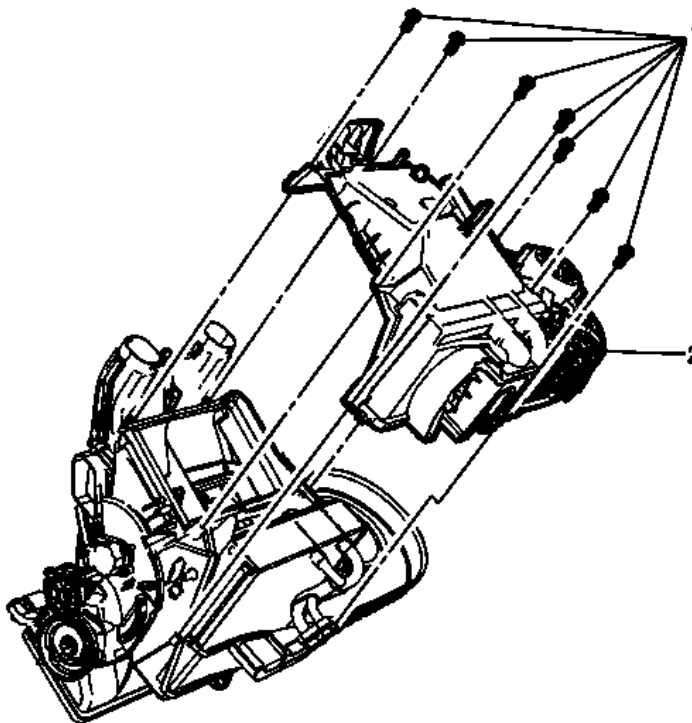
Heater & Air Conditioning Evaporator & Blower Lower Case
